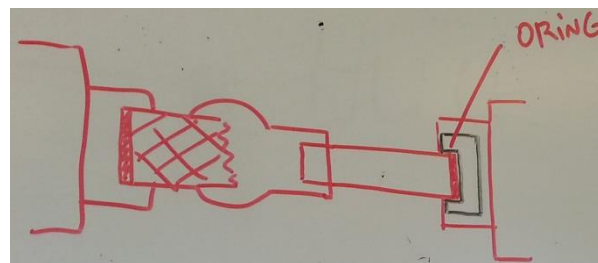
Connector silicone tube and fitting – Hand drawing (A.O.P.)
